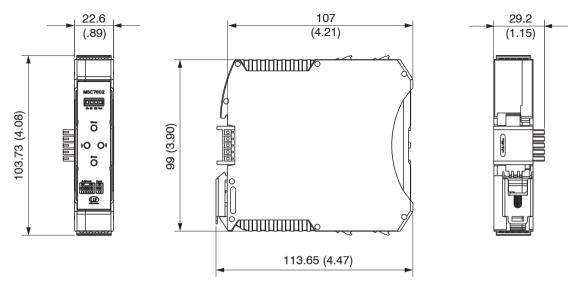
Dimensions of MSC7602 controller model, dimensions in mm (inches)
